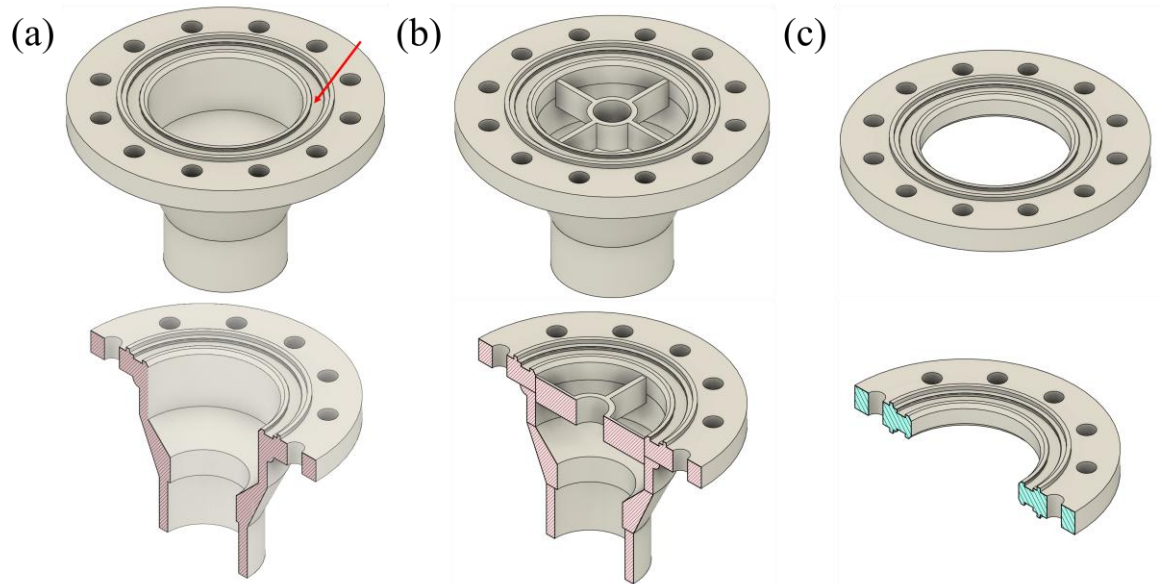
Diagram of 3D printed tube transducer connectors, (a) Pipe-to-tube connector (the red arrow indicates the location of the annular groove), (b) Pipe-to-tube connector for fixing the swPCD, (c) Tube-to-tube connector.
